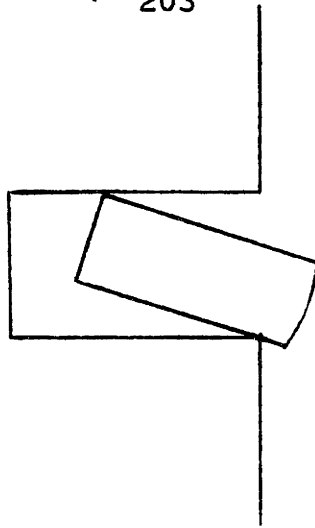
An exaggerated schematic showing the ring fully blocking both ring side clearances.
